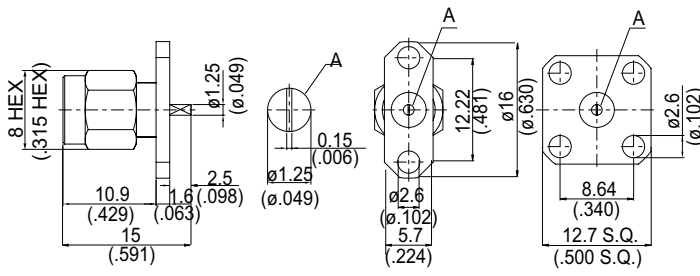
2-hole flange Fig. 6-2:square flange
